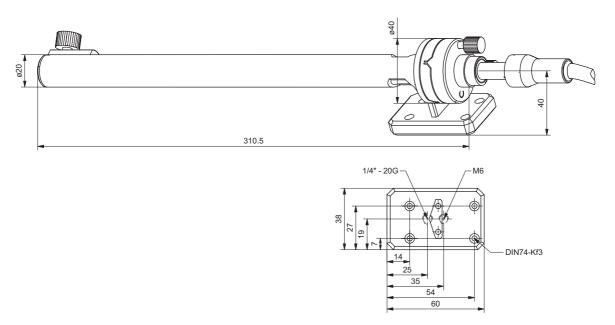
Side view and bottom view of the reference head OFV-152 (dimensions not specified are given in mm)
